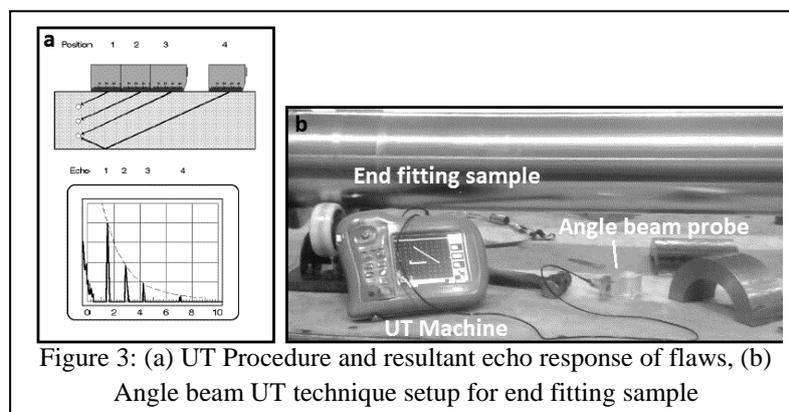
(a) UT Procedure and resultant echo response of flaws, (b) Angle beam UT technique setup for end fitting sample
